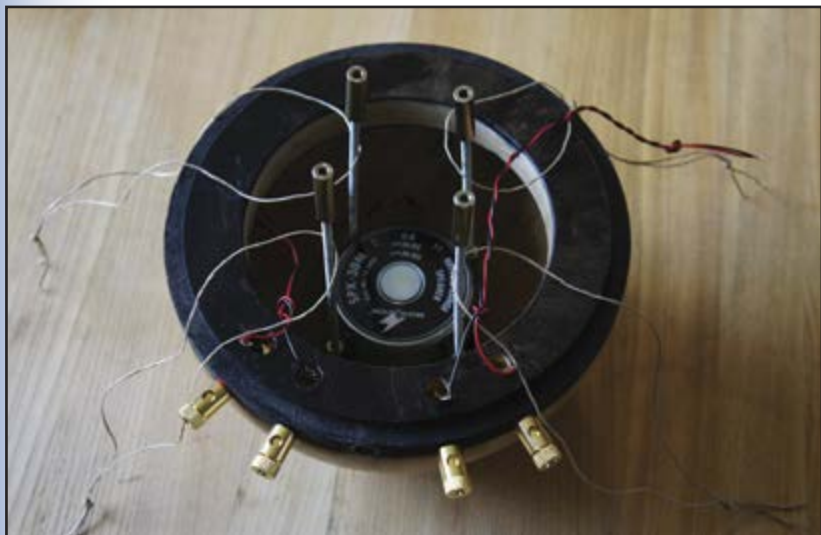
Attaching strings around the threaded rod makes it easier to line up the holes in the bowl.
